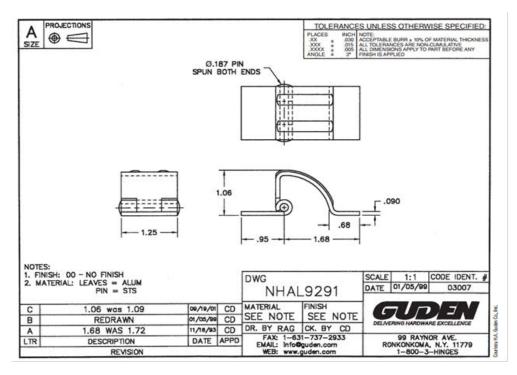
This product is an example of a detailed assembly with its component parts assembled in a manufacturer's catalogue. Dimension values in this Figure are in inches.
